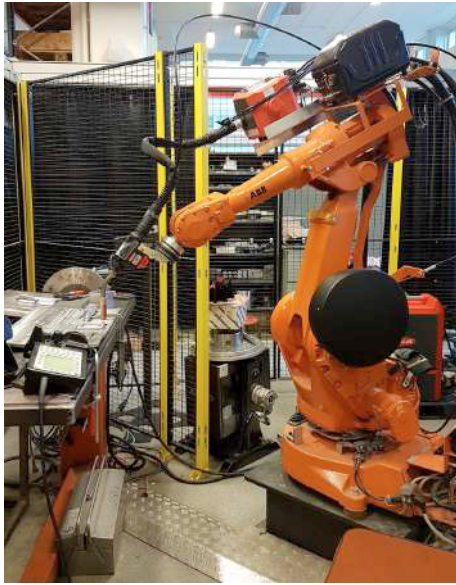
Experimental set-up: ABB IRB2400/10 robot manipulator with welding equipment from Fronius.
